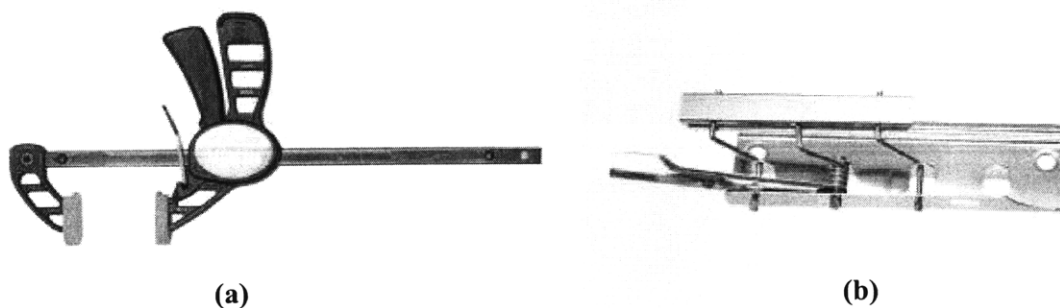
(a) Quick-grip clamp and (b) a spring binder clamp
